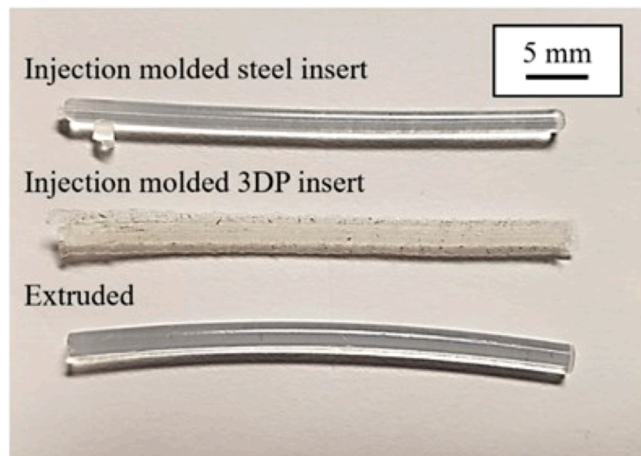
Macroscopic imaging of samples fabricated via injection molding with a steel insert, injection molding with a 3D printed insert (molded using Design 4 – 100% infill with shutoff), and extrusion.
